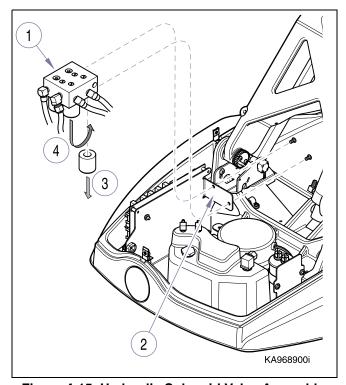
Hydraulic Solenoid Valve Assembly.
